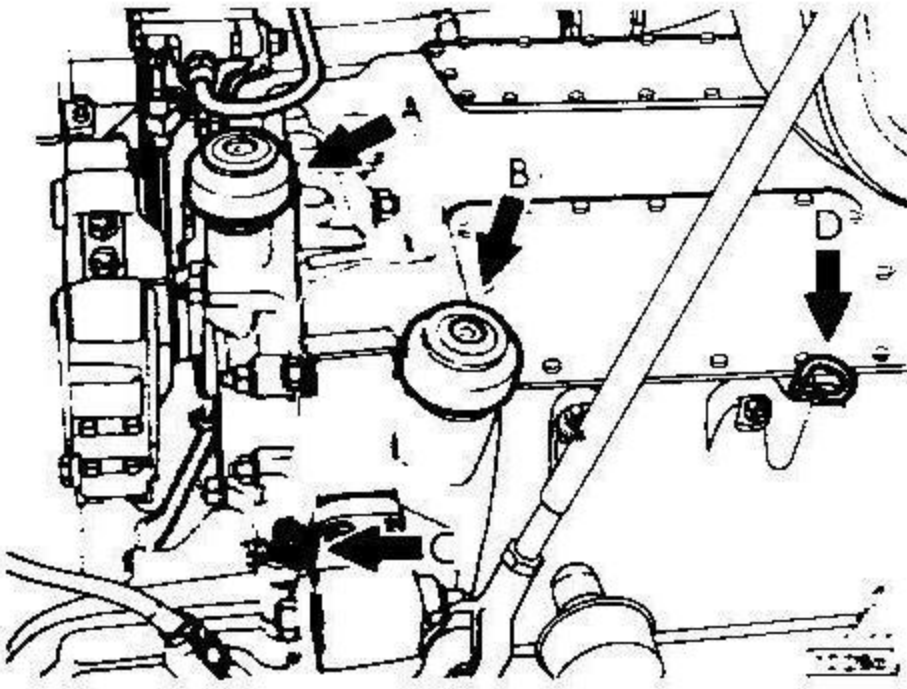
Location of transfer box and gearbox filler plugs and dip sticks.
